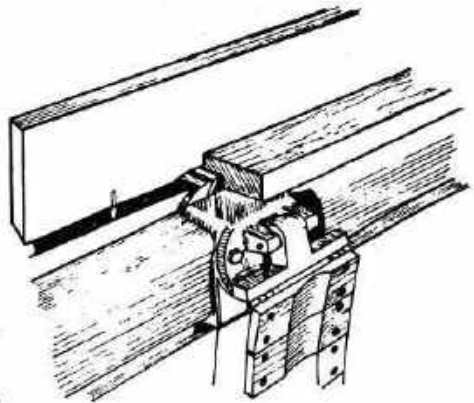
A. A JOINTER WHICH IS DESIGNED TO CUT RABBETS
